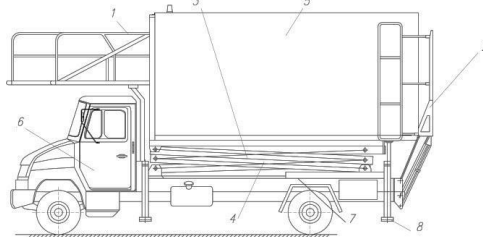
The catering vehicle for handling of extra-high aircraft deck: 1-retractable platform; 2 - rear platform; 3 – the hydraulic cylinder of the elevating gear; 4 – multi-scissors link elevating gear; 5 – elevated van body; 6 – cabin with chassis 3UJ 5301; 7 - elevating gear support frame; 8 – stabilizers.
